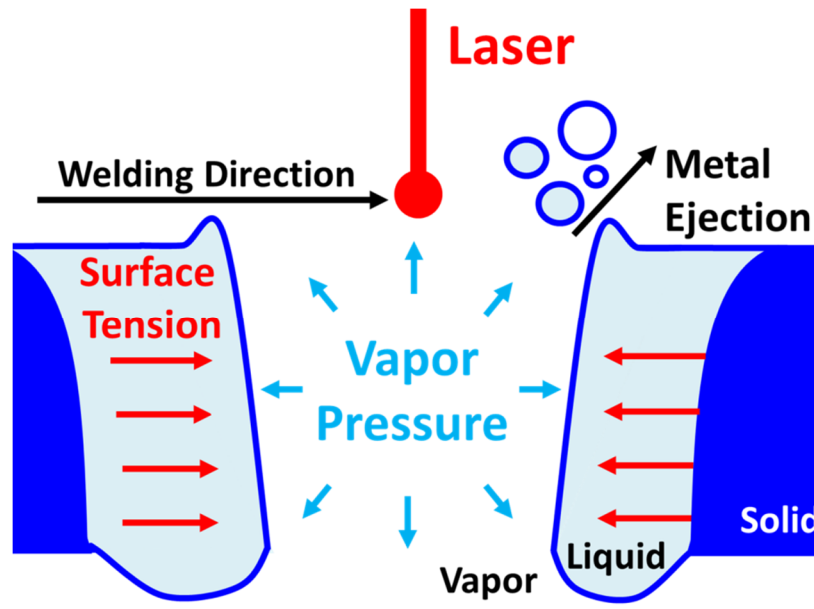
Metal ejection from weld pool in keyhole mode welding
